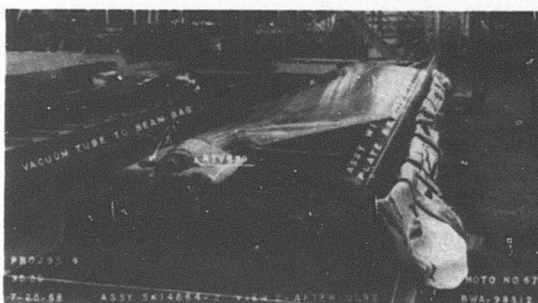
Cured Blade Assembly Before Installation of Final Detail Parts.
